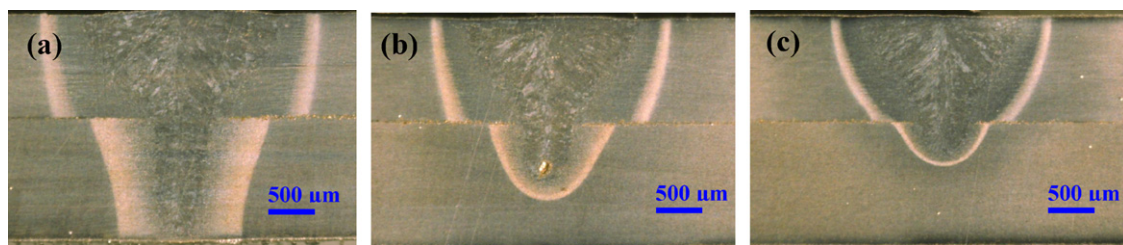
The cross-sectional views of DP980 weld obtained by laser power of 2.5 kW and fully removed zinc coating at the faying interface (a) $v=30$ mm/s, (b) $v=40$ mm/s, and (c) $v=50$ mm/s.
